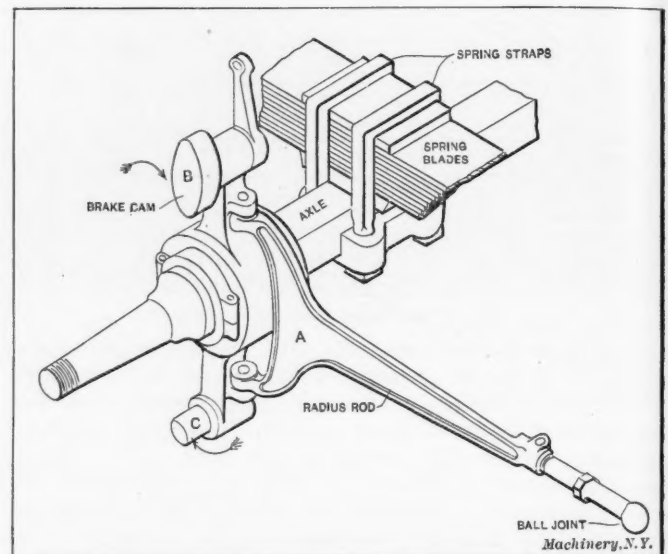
Improved Method of Mounting Expanding Band Brakes
